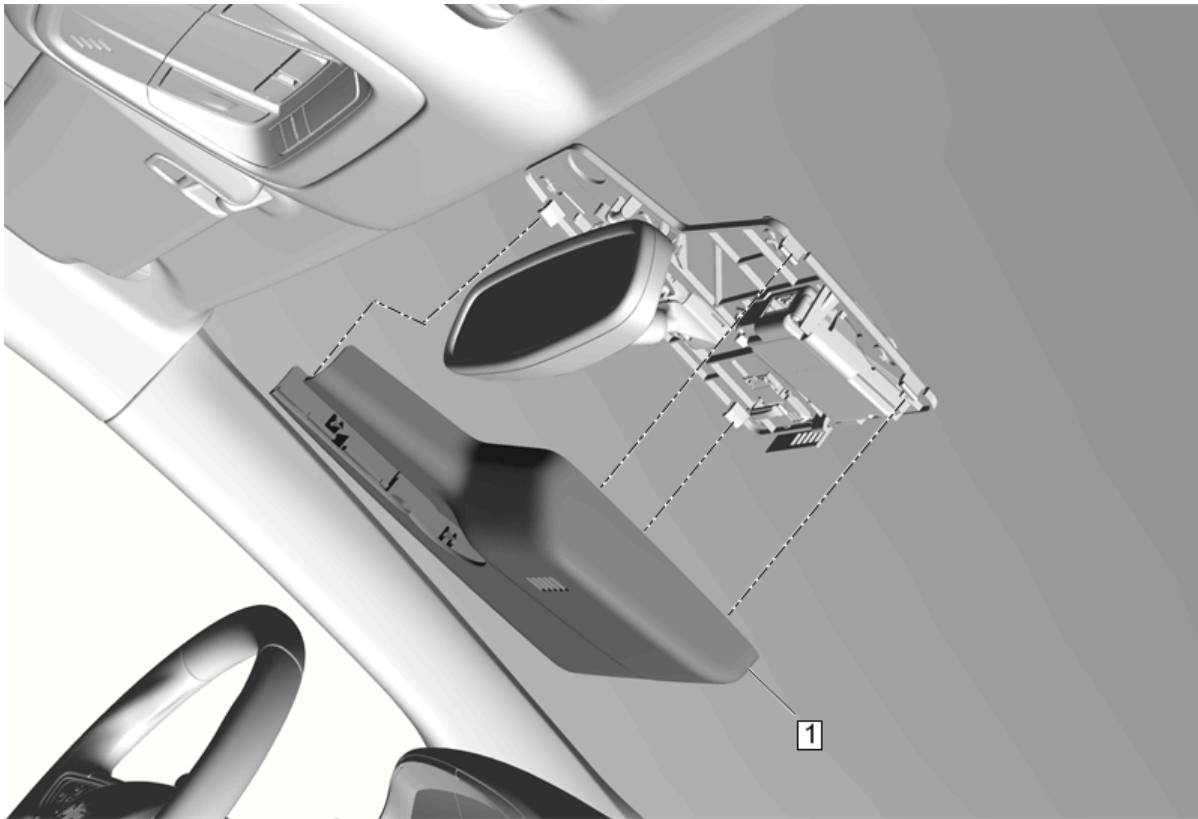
Windshield Multifunction Sensor Mount Bracket Lower Cover
